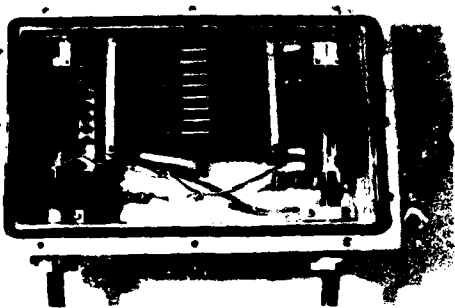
Jointing box model 2 of outdoor type with gas tightness
